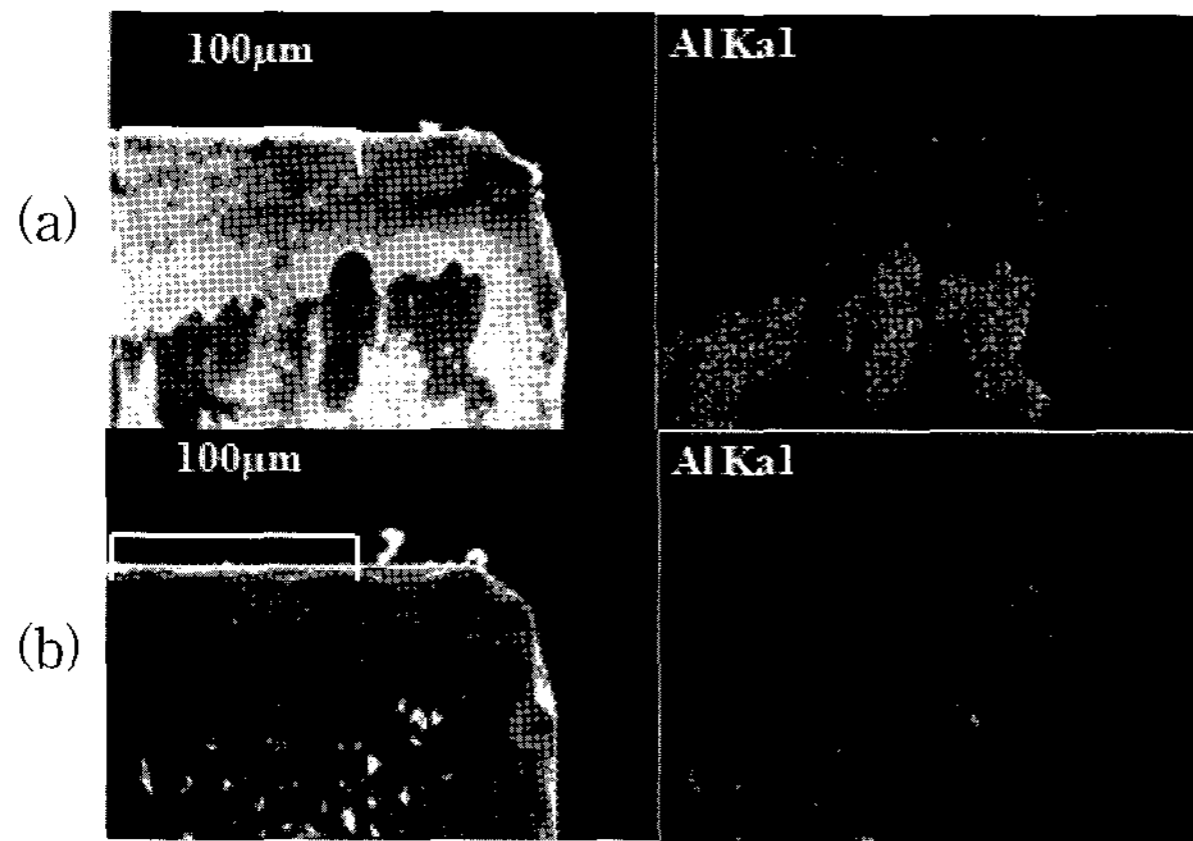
Analysis of WC insert tip after dry machining of Al 6061, uncoated specimen (a) and DLC coated specimen (b).
